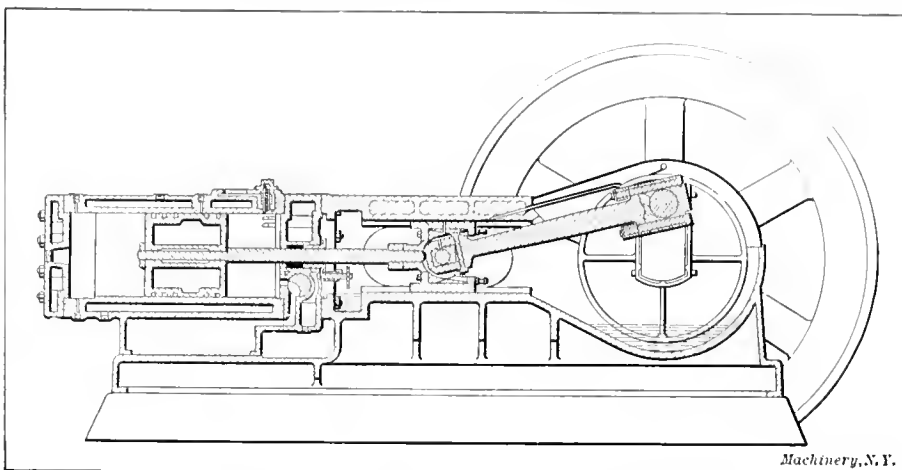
Sectional View of the Combination Gas Engine and Compressor
